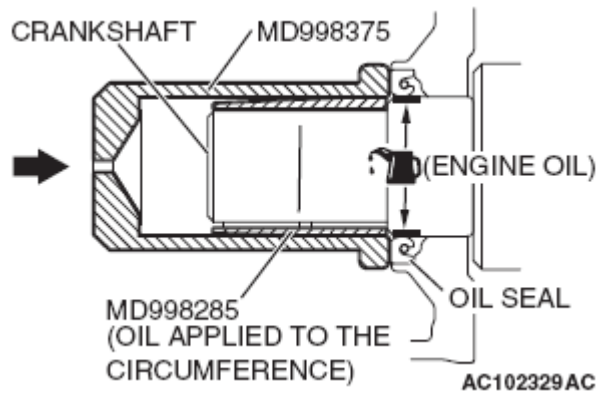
Inner Diameter Of Crankshaft Front Oil Seal Lip Engine Oil Applying Area
